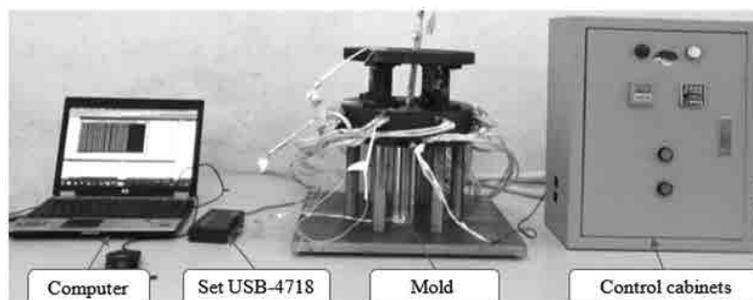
Experiment image of heating and temperature measuring for deep drawing mold
